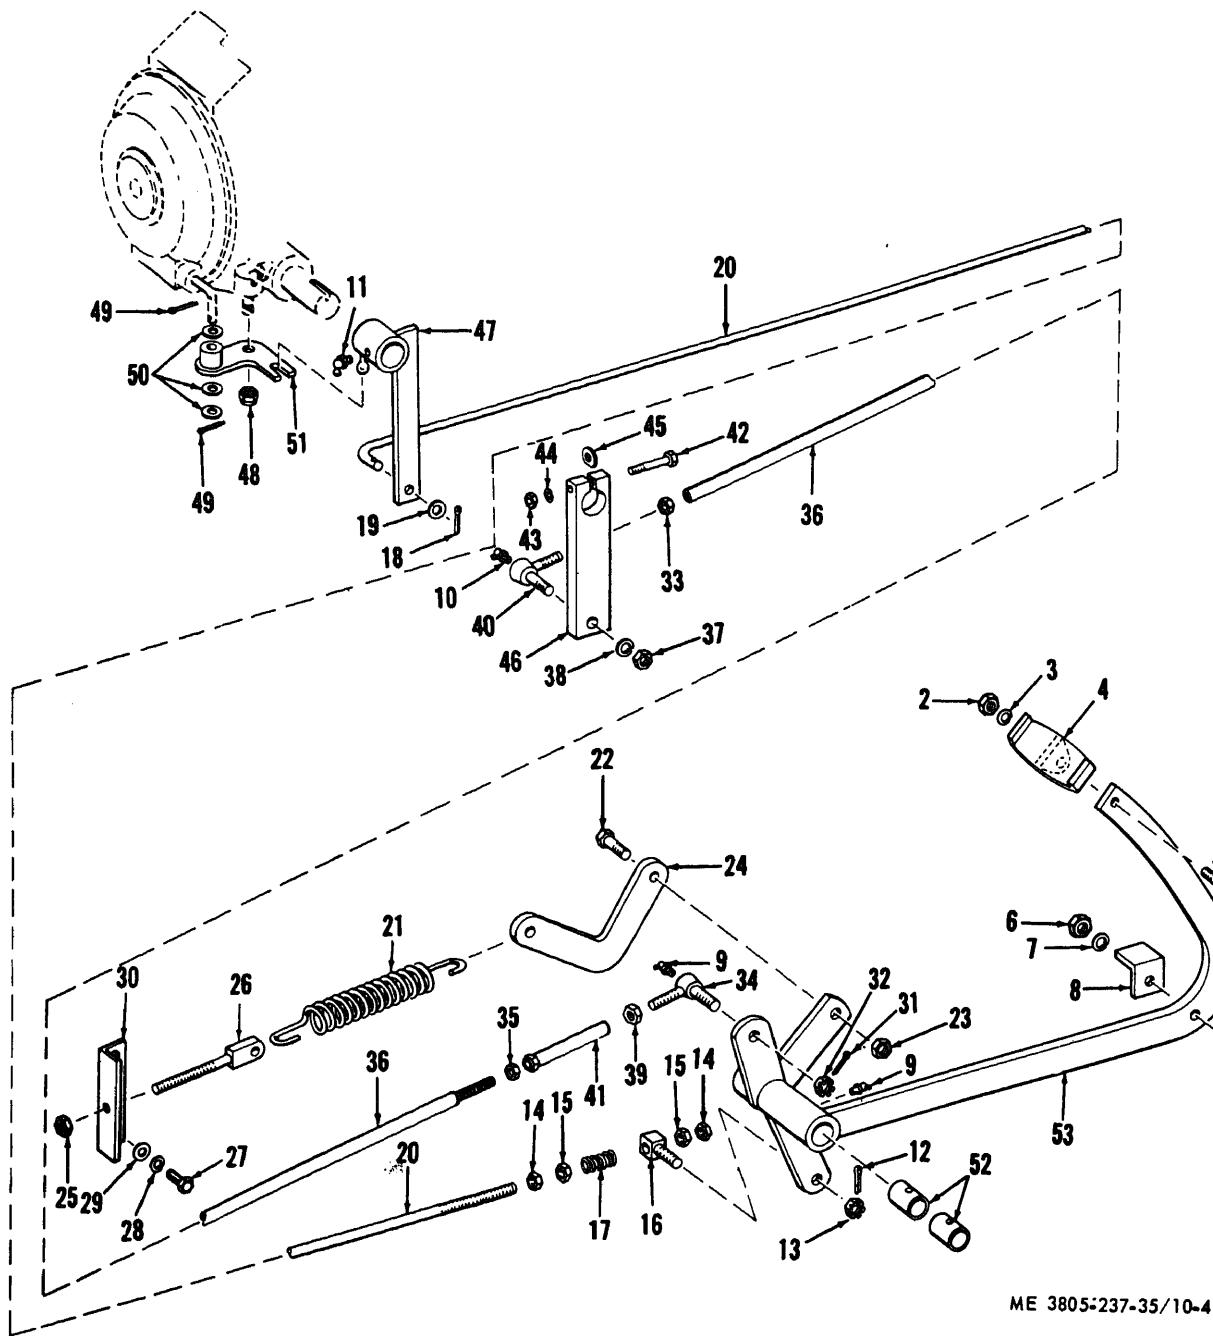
Clutch and clutch brake linkage, exploded view.
